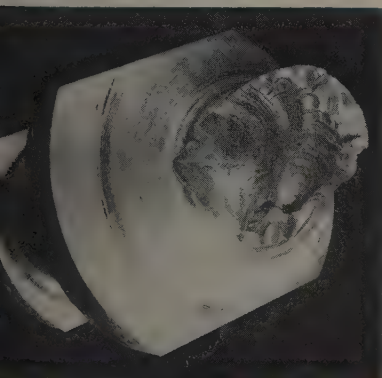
End view of fracture shown in Fig. 2. Section weakened by crack, twisted off
